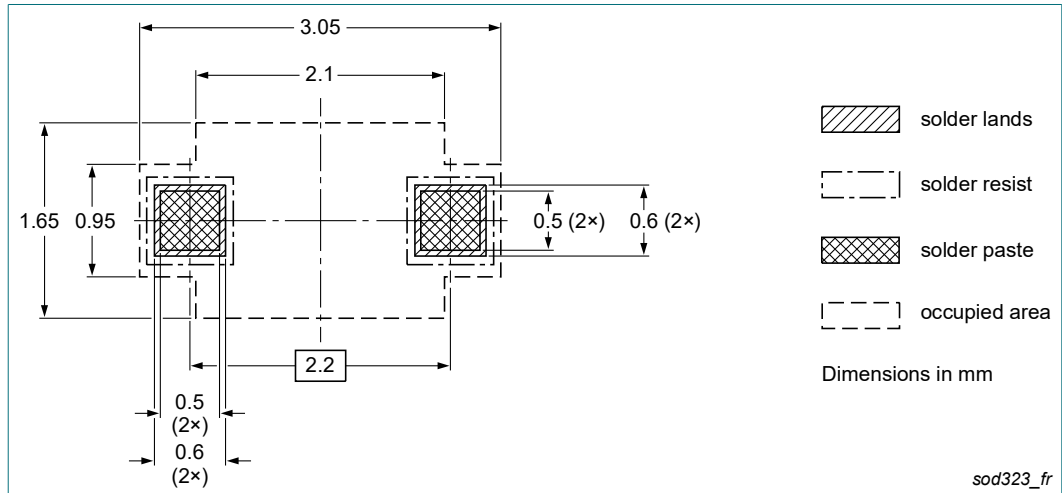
Reflow soldering footprint for SOD323 (SC-76)
